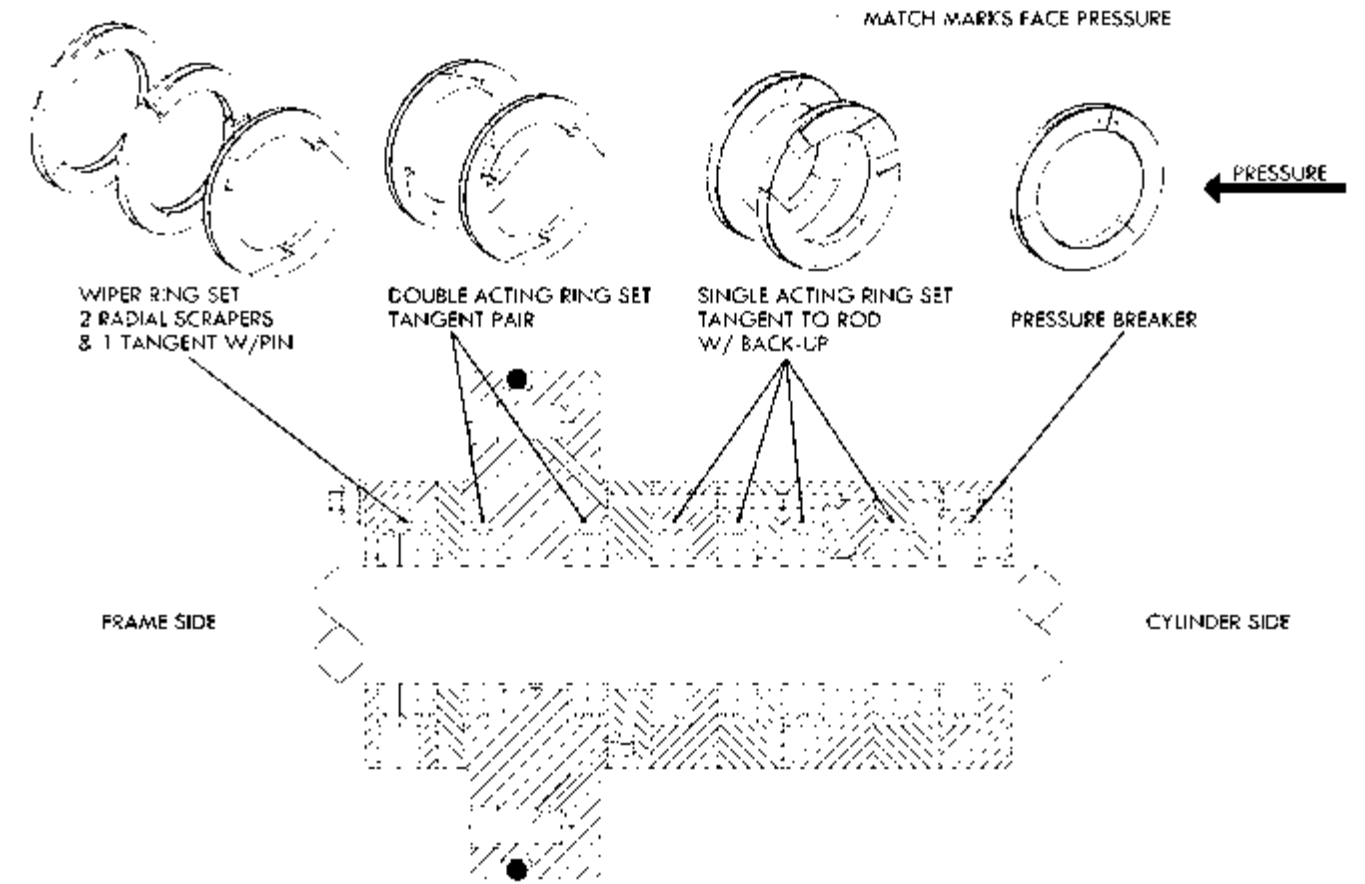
Piston Rod Pressure Packing Exploded Views
